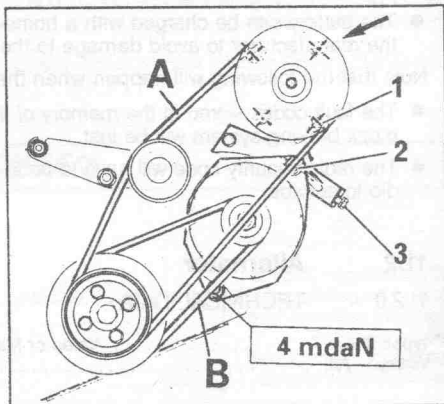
Drive belt layout on models without A/C system. Bolt (1) is used to adjust the belt of the hydraulic pump (A). Bolt (3) and nut (2) are employed to adjust the tension of the alternator belt (B).
